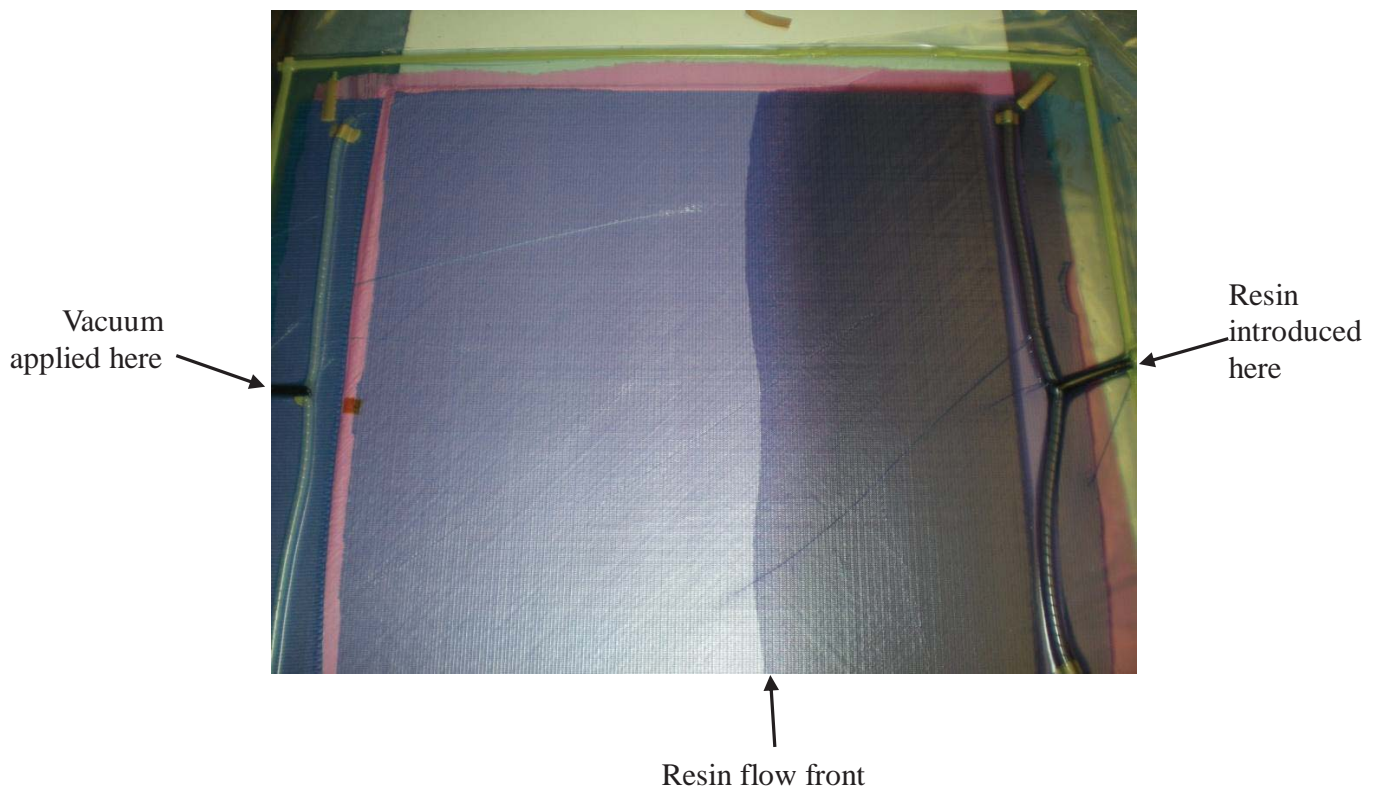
Laminates being manufactured by vacuum assisted resin transfer moulding (VARTM) process
